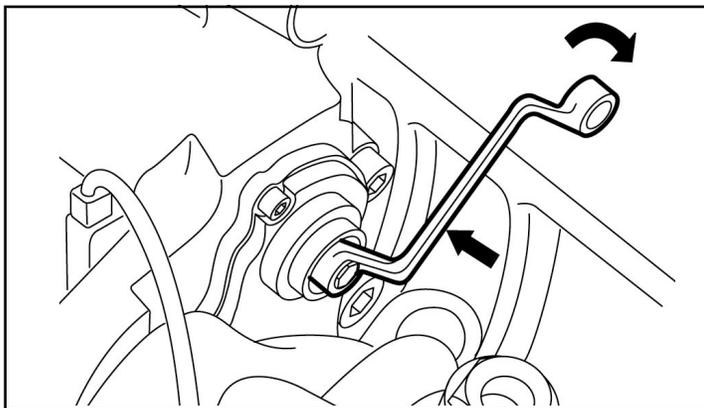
ADJUSTMENT MECHANISM TEST
